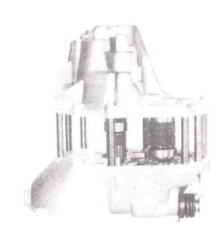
The casings bolted together using the bearing adjusters and transmission case support collars (Sec 9)
